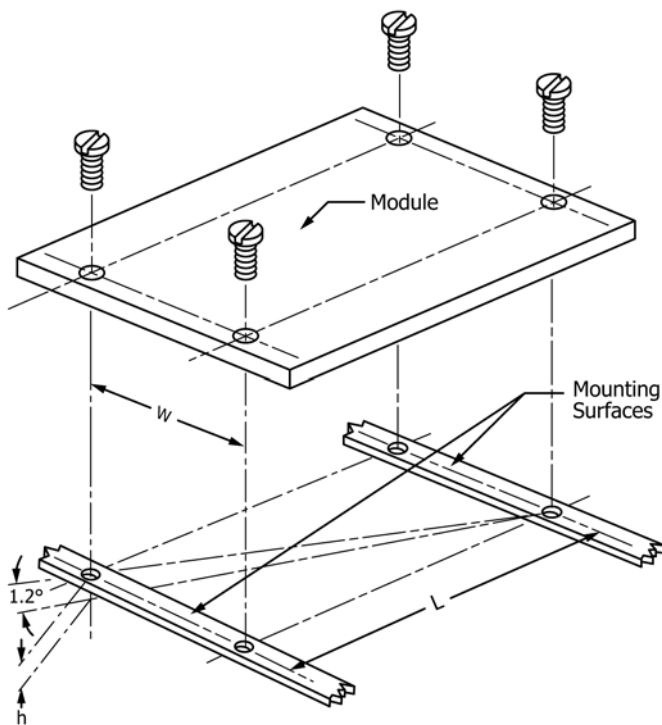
Deflection to be Applied by the Twist Test Fixture
